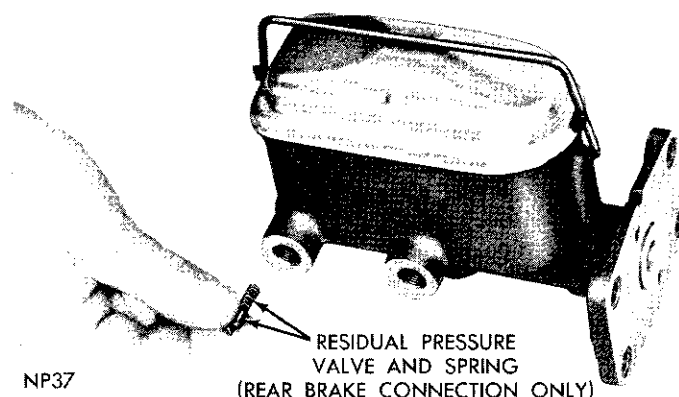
Removing or Installing Residual Pressure Valve and Spring
